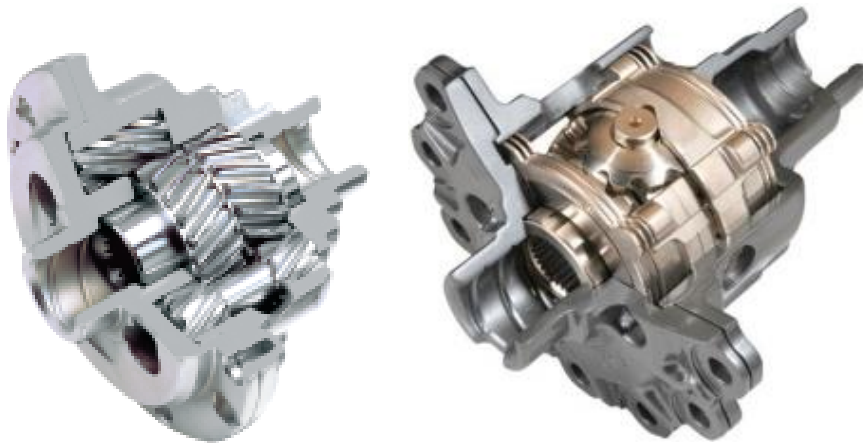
MLSD by helical gear or multi-plate (courtesy of GKN).
